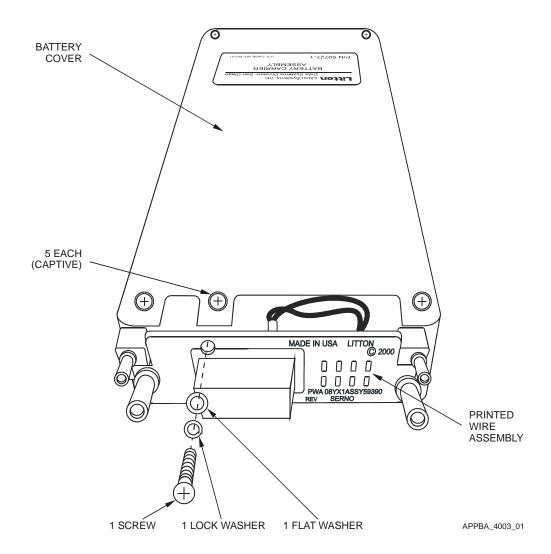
Remove and Install Battery Carrier Assembly Covers
